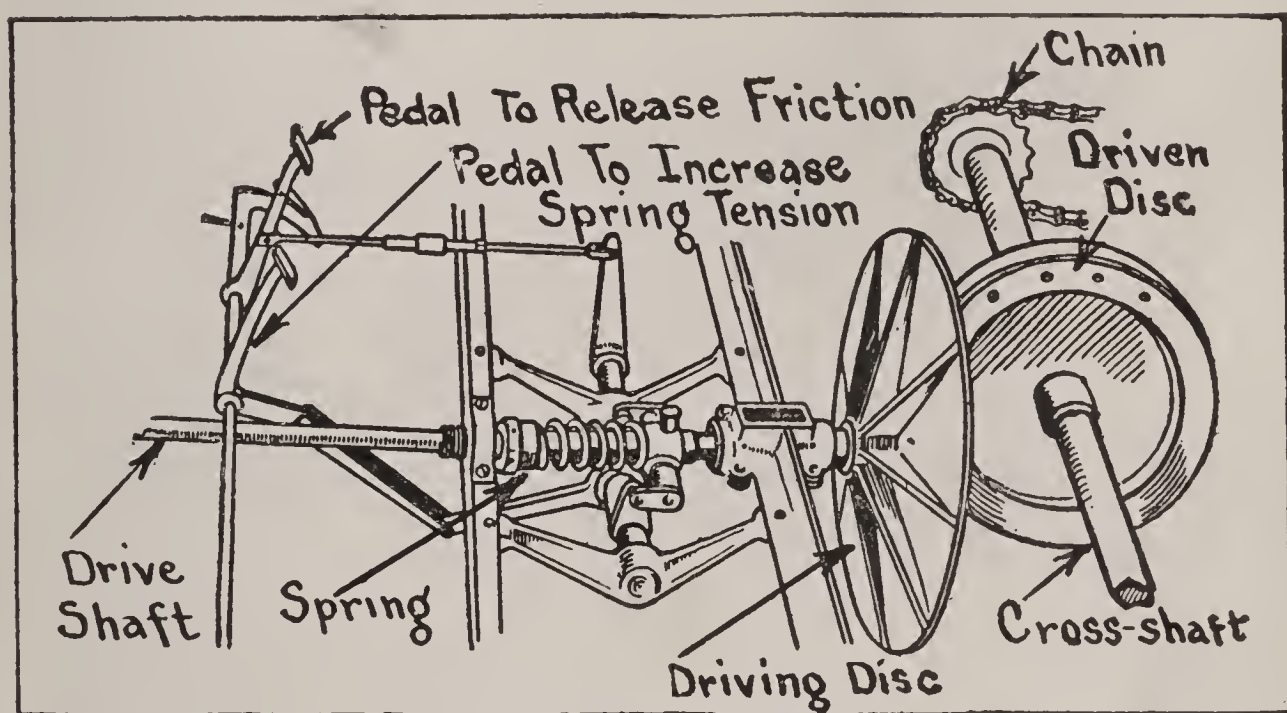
Arrangement of Friction Change Speed Gearing Used in Many Cyclecars.
